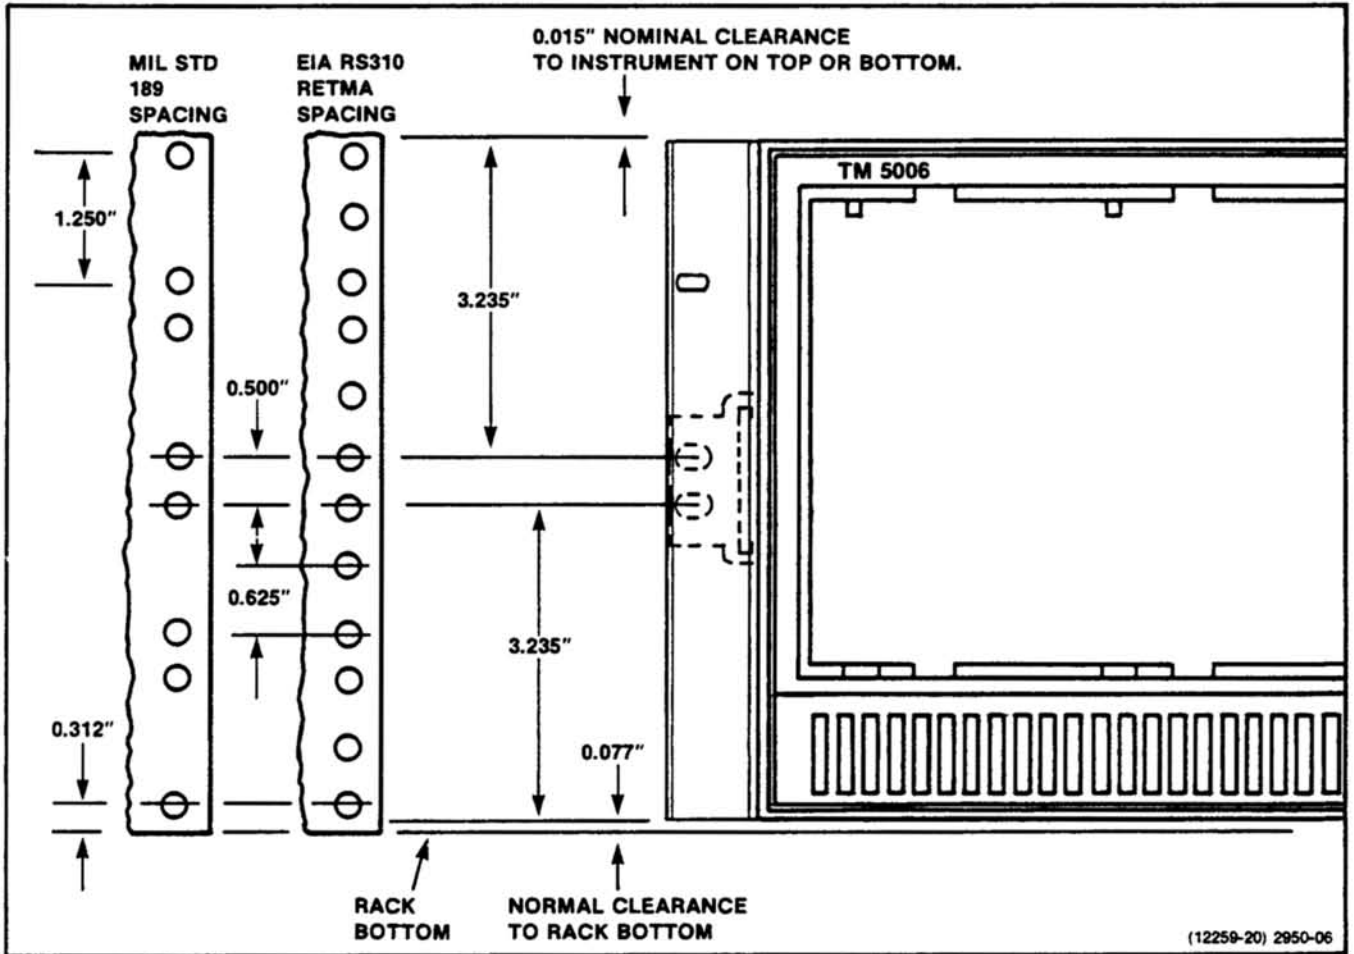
Dimensions and positioning of TM 5006, Option 10, in standard rack.
